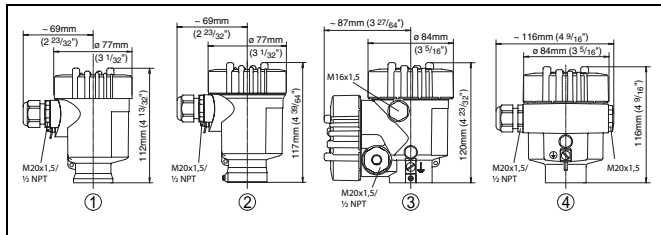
Housing versions in protection IP 66/IP 67, with integrated indicating and adjustment module the housing is 9 mm ($\frac{1}{64}$ ") higher
